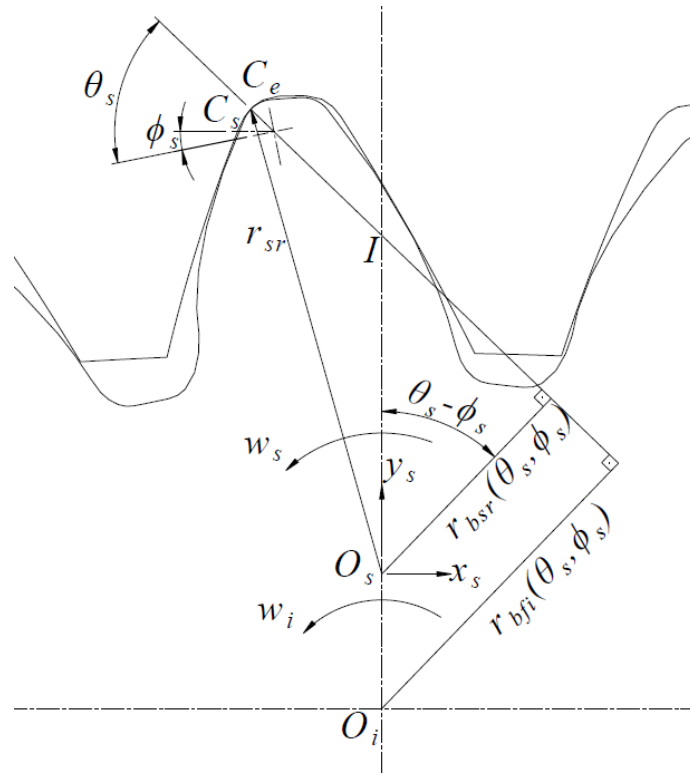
Generation of internal gear root fillet surface by the rounded surface of the shaper cutter
